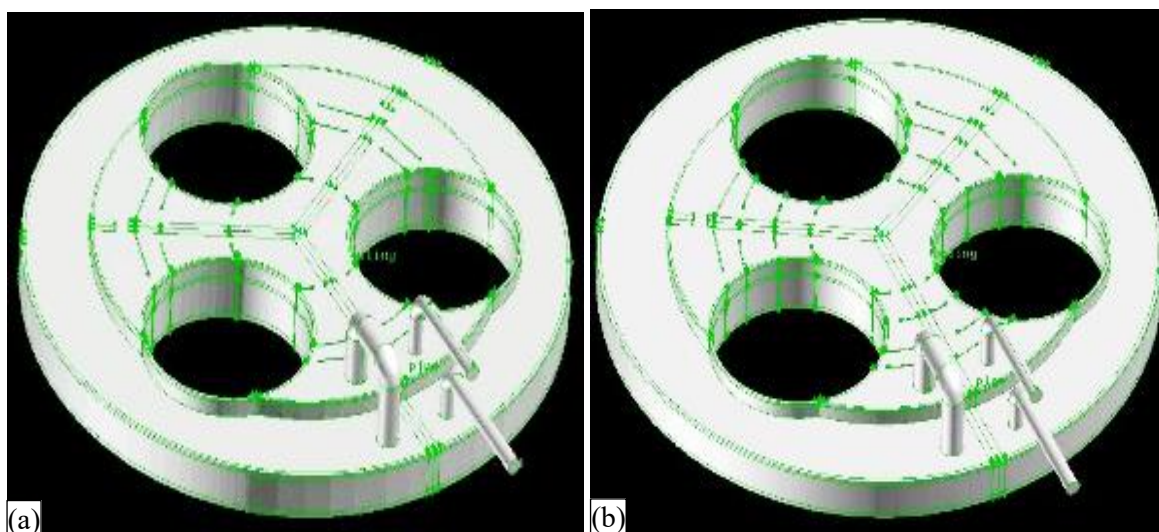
Structure of each plan (a: plan 1, b: plan 2).
